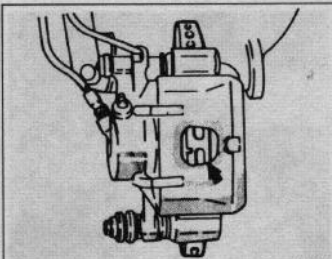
Inspect front disc pad thickness through caliper body check port
